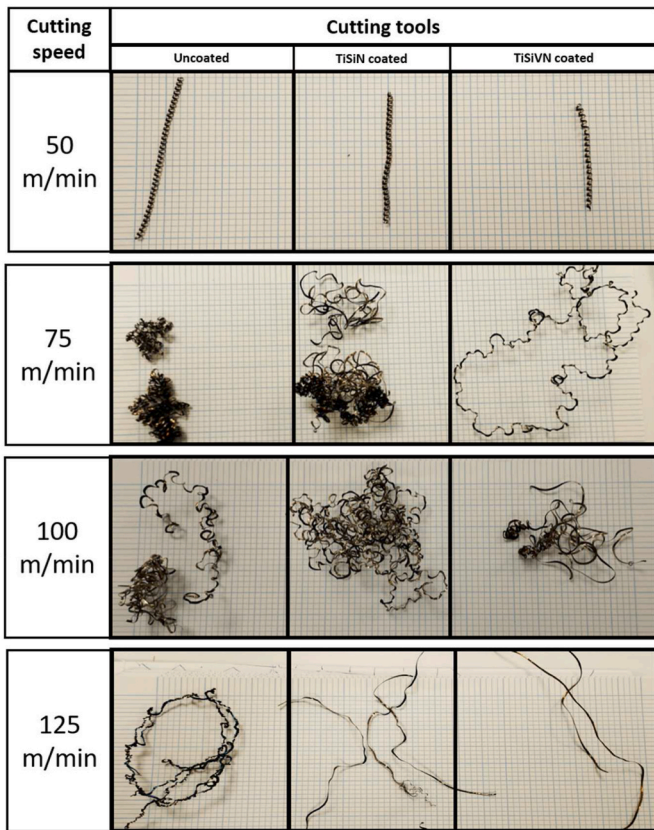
Optical microscopy images showing chip formation during machining with uncoated, and TiSiN and TiSiVN coated cutting tools.
